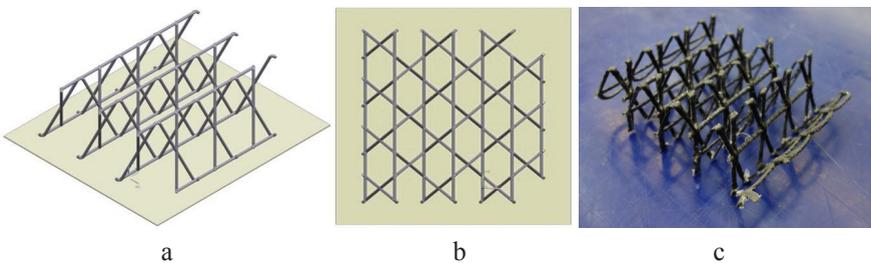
X-shaped truss structure with longitudinal reinforcement: a – linear corrugation truss structure, b – net, c – truss structure sample
